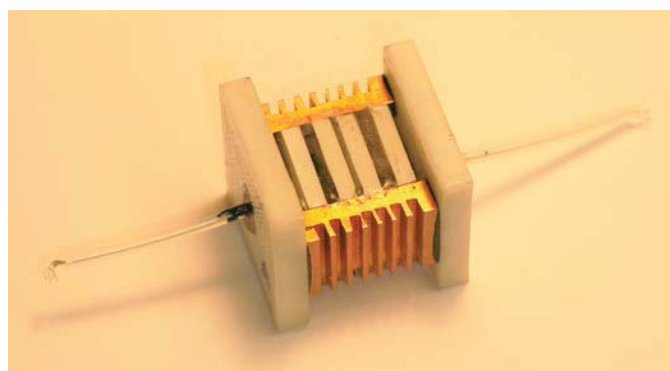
Final stacked assembly showing locations of the encapsulant deposition.
